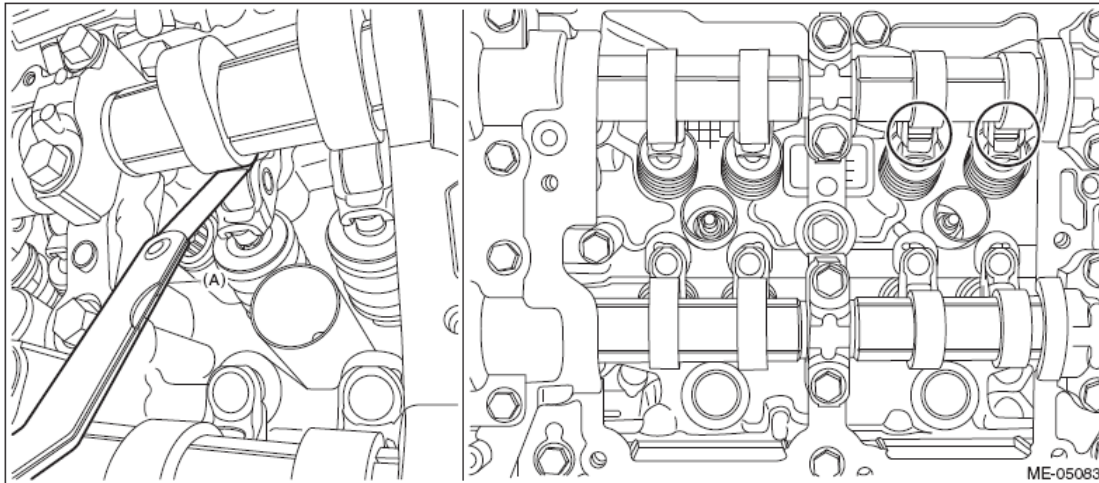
Checking Clearance Of No. 4 Cylinder Intake
